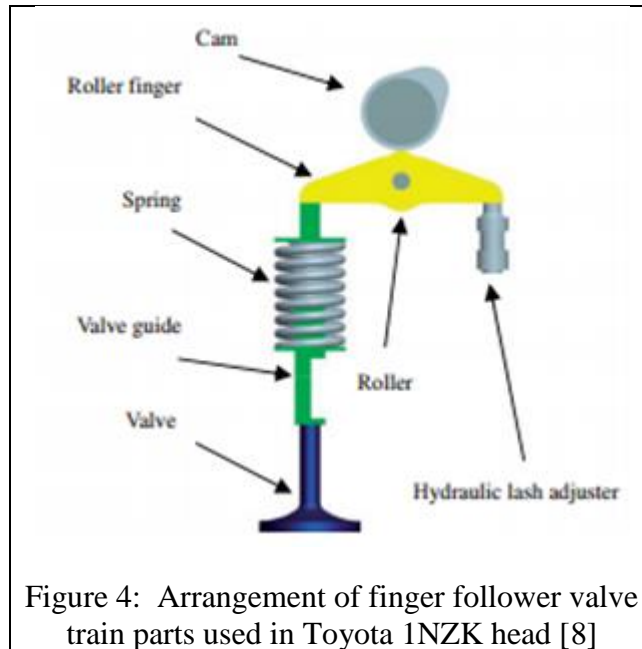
Arrangement of finger follower valve train parts used in Toyota 1NZK head [8]
